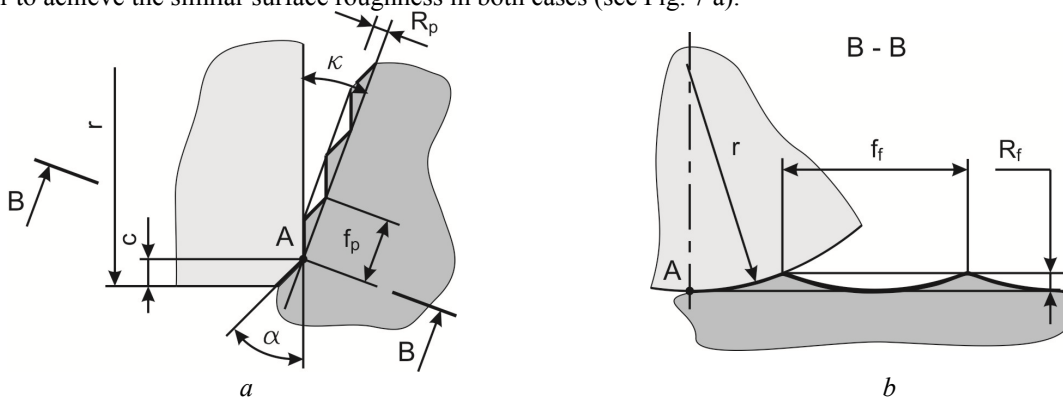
Schemes for calculating the surface roughness along a) the tooth profile and b) the tooth flank line
